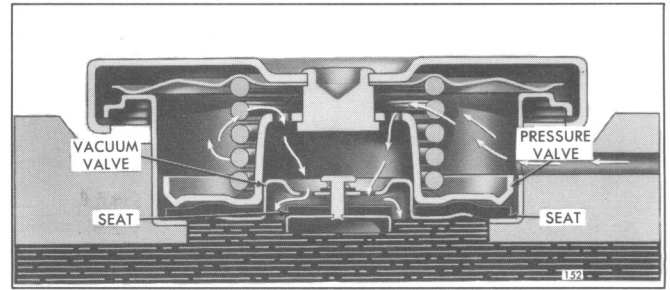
Pressure Control Cap (Vacuum Valve Open)
